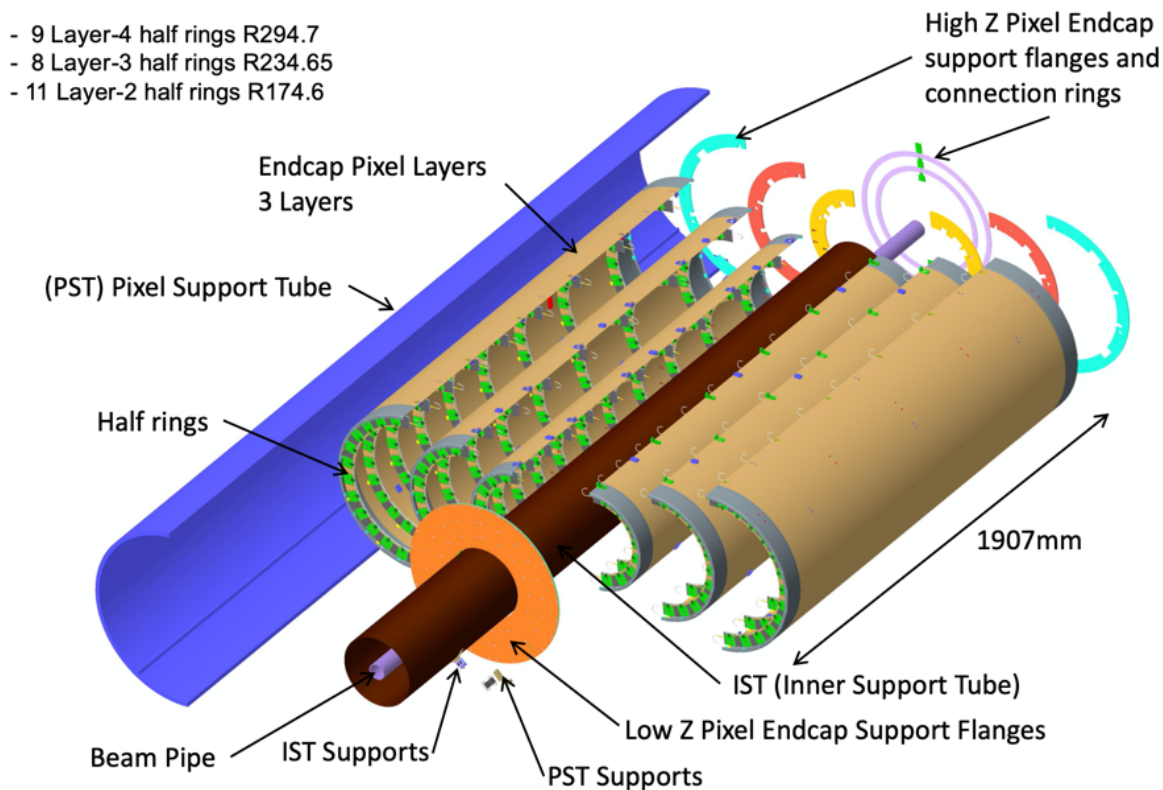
CAD representation (exploded view) of one ITk Pixel Outer Endcap.
